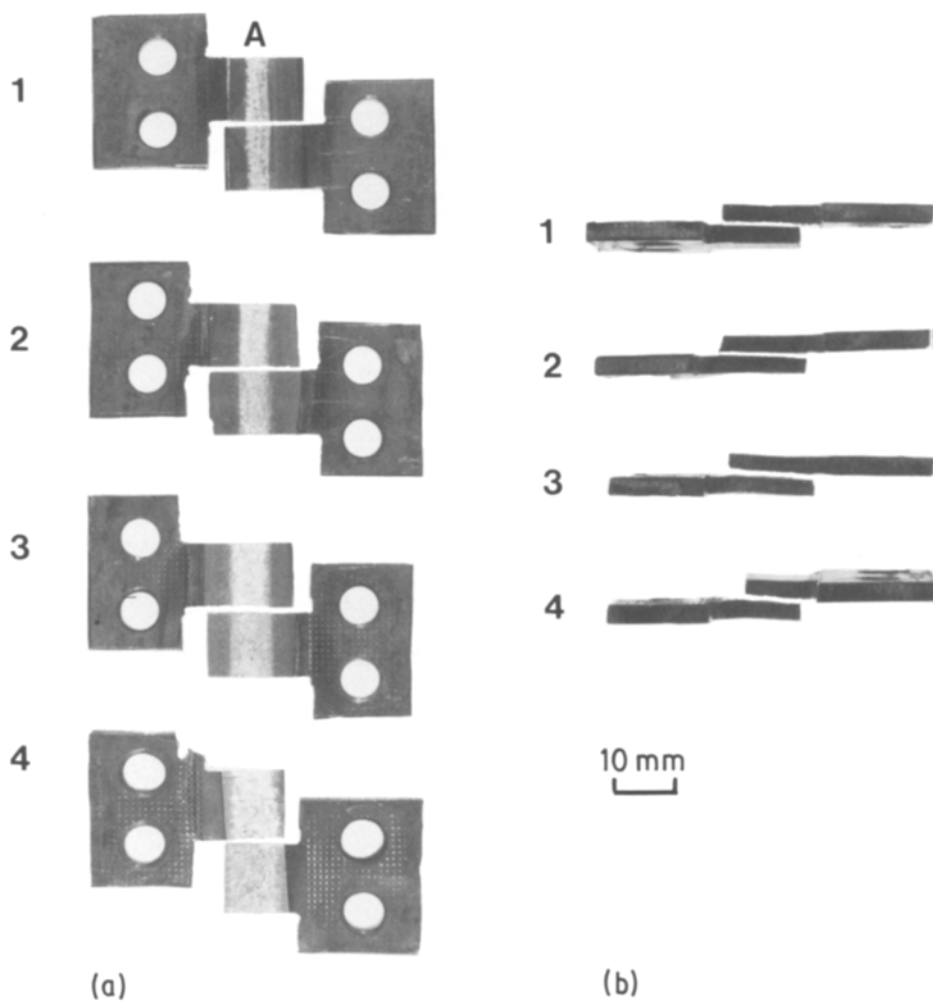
Type 1 single overlap diffusion bonds after fracture. (a) Fracture faces, (b) Edge view of test pieces. (1) $L = 2$ mm, (2) $L = 4.5$ mm, (3) $L = 6.3$ mm, Type (b) interfaces, (4) $L = 8.8$ mm, Type (a) interface.
